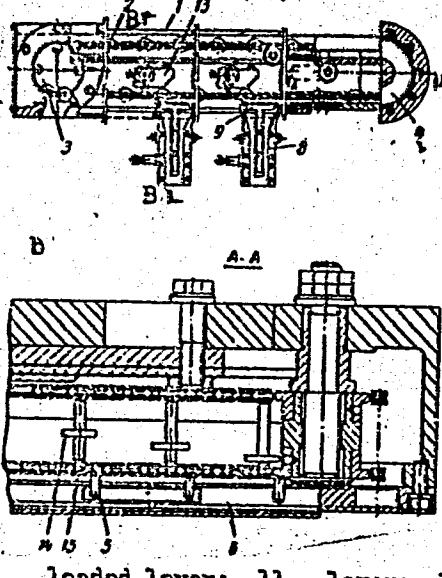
1 - distributive conveyer; 2 - endless closed chains; 3 - drive sprocket wheel; 4 - tension sprocket wheel; 5 - pin-shaped push-rods; 6 - chute; 7 - ports; 8 - outlet branches; 9 - double-armed spring-loaded interceptors; 10 - double-armed spring; 11 - lever; 12 - axle; 13 - pawl; 14 - roller; 15 - axle.
